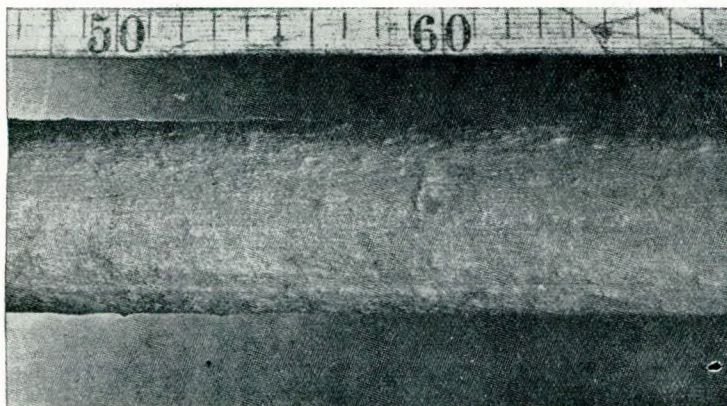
Siemens Martin steel. Small bore. No cracks.
